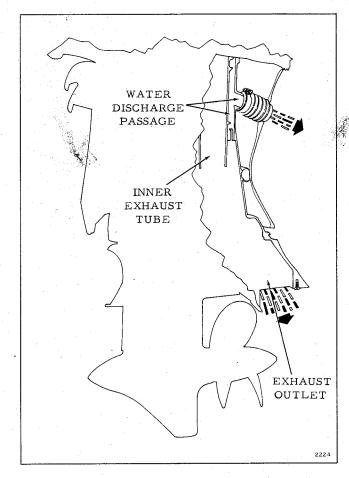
Lower Unit Cutaway Showing Exhaust Relief
